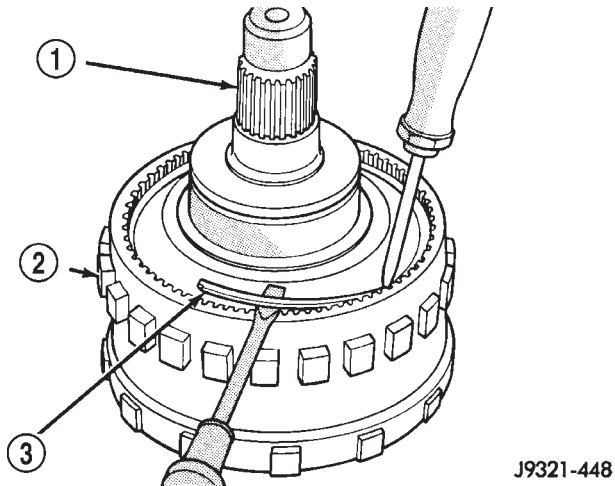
Clutch Drum Inner Retaining Ring Removal
